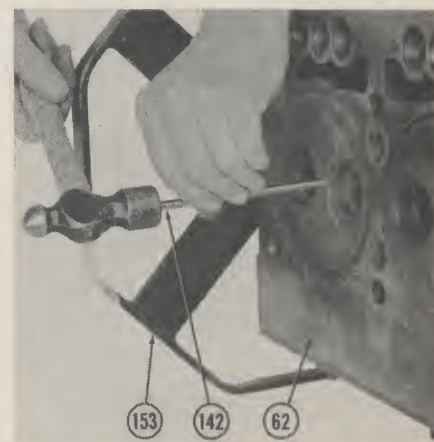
B—GM engine. Second step in removing an injector hole copper tube is by bumping on end of thread tap using a small diameter rod (142).
